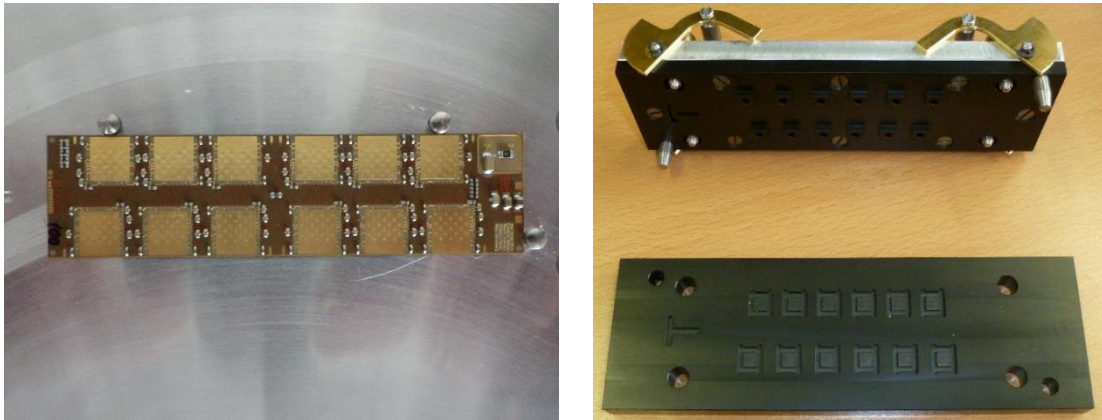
Hybrid and tools used to glue the ASIC chips. Hybrid without the read-out ASIC chips (left) and mechanical tools used to place the read-out ASIC chips on the hybrid (right).
